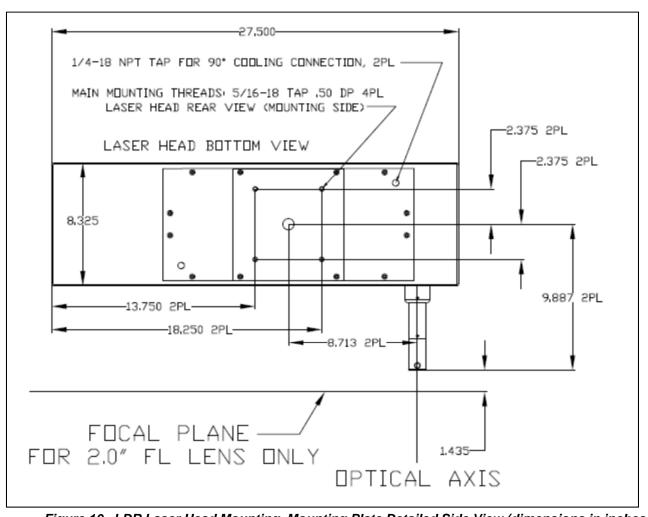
LDR Laser Head Mounting, Mounting Plate Detailed Side View (dimensions in inches)
